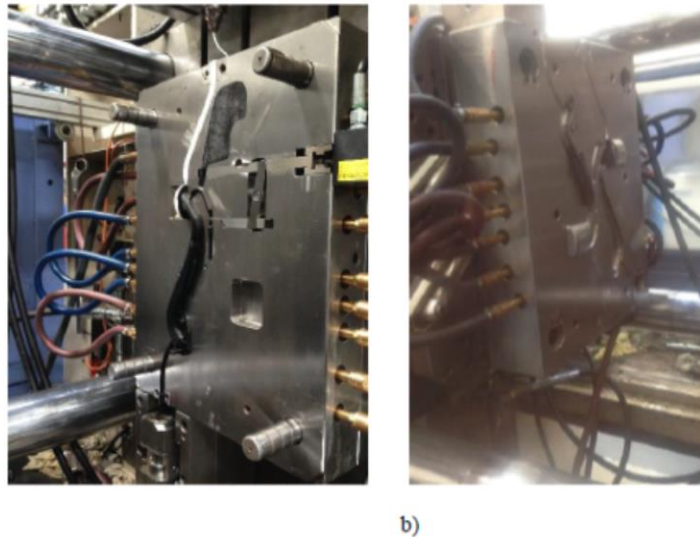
a) Mold fixed cavity after the injection molding process; b) Mold mobile cavity with the prepreg fixed by the dummy developed for the purpose.
